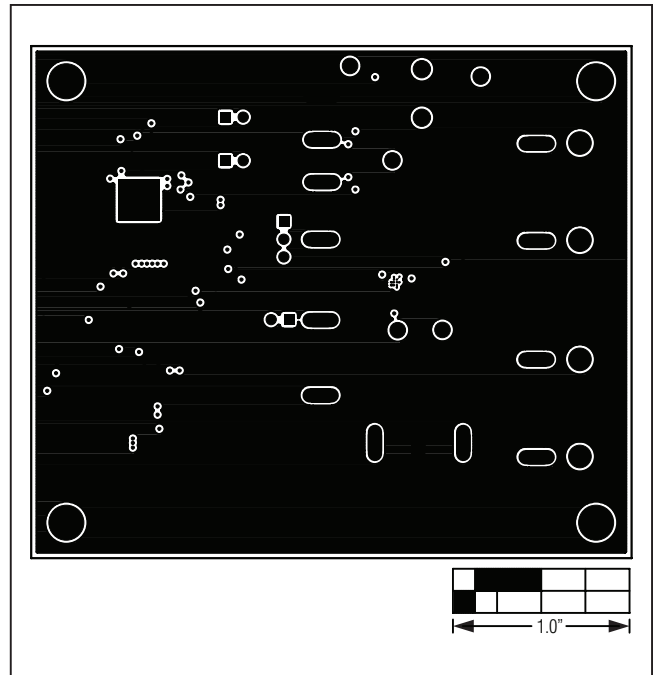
MAX97003 EV Kit PCB Layout—GND Layer 2
